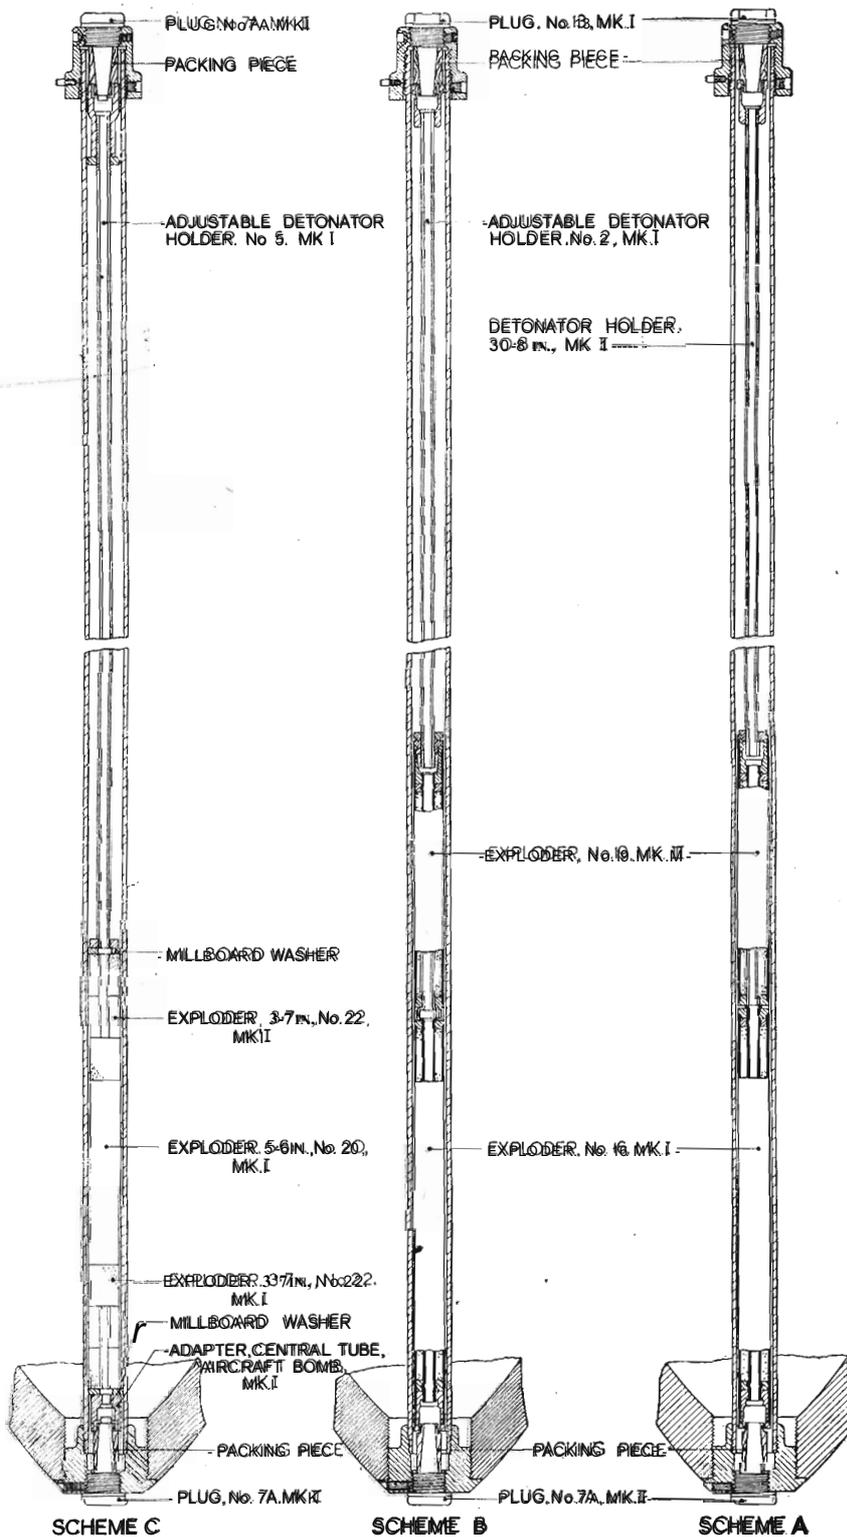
Bomb, H.E., aircraft, G.H., 500 lb., Mk. II, III, or IIII, exploded to Schemes A, B, and C
